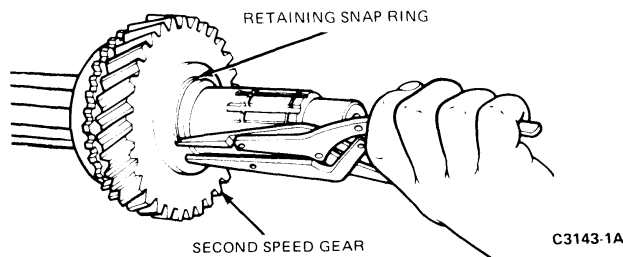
Removing Second Speed Gear Retaining Snap Ring
